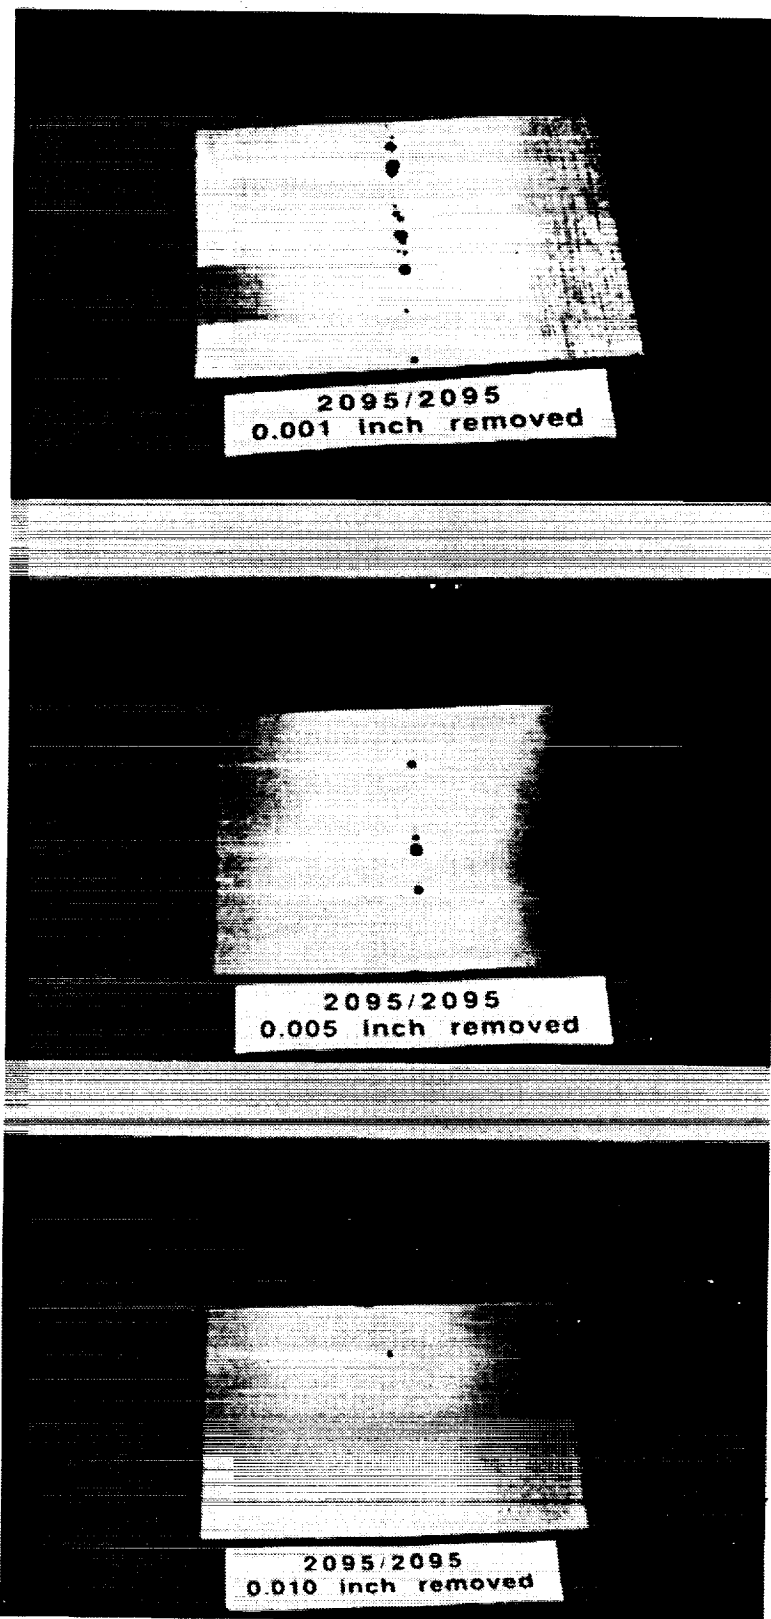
Photographs of 2095-T6 to 2095-T8 Laser Beam Weld Specimens After Dye Penetrant Testing Showing Degree of Porosity at the Interface Associated With Chemical Milling of 0.001, 0.005, and 0.010 Inch (0.02, 0.13, and 0.25 mm) Per Side.
